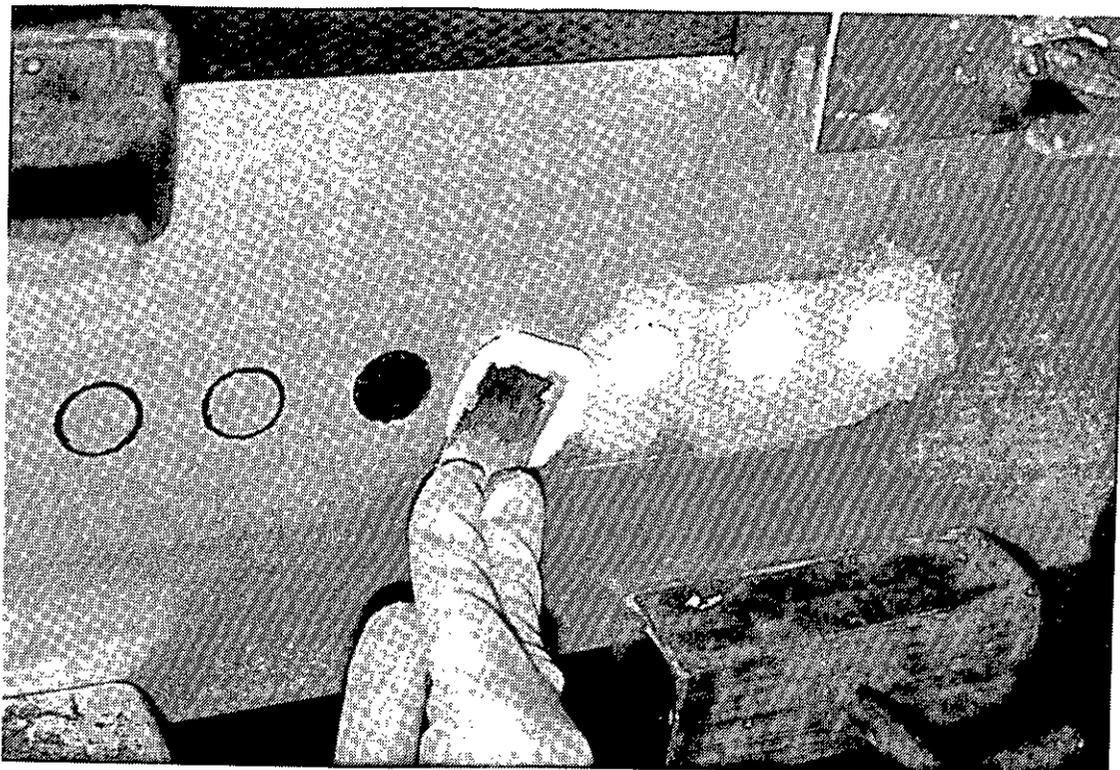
(b) Unacceptable burrs on core details after cutting.
